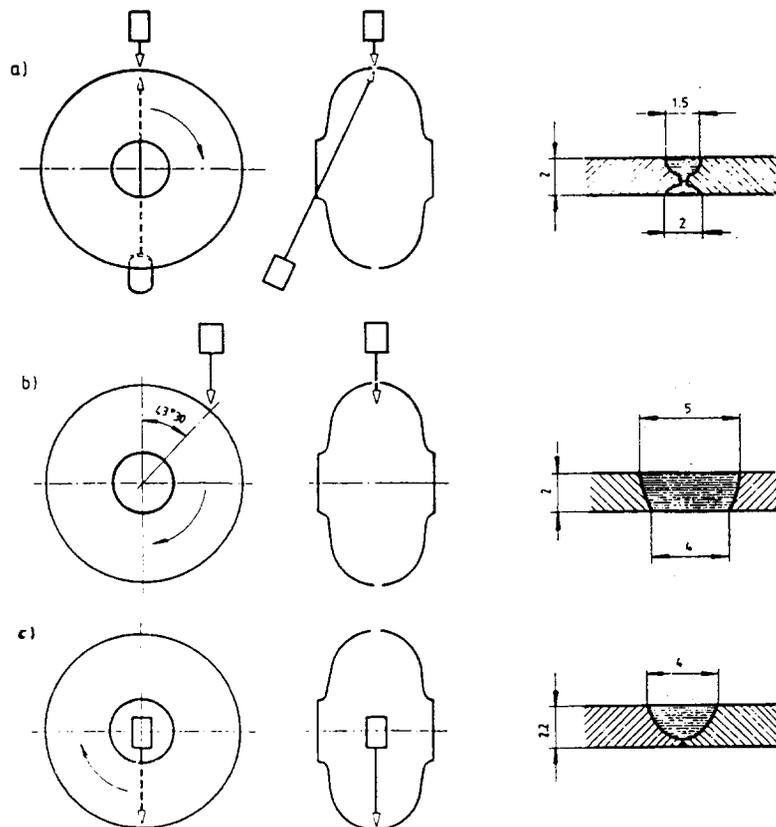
Methods for electron beam welding of Nb cavities. (a) External-internal. (b) External welding only: the angle of  $43^\circ$  is chosen for an improved stabilization of the welding pool. (c) Welding by internal gun. The shape and size of the welding seam are also shown.
